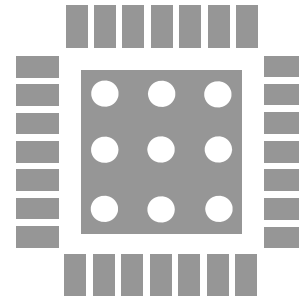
ISL97687 TQFN PCB VIA PATTERN
